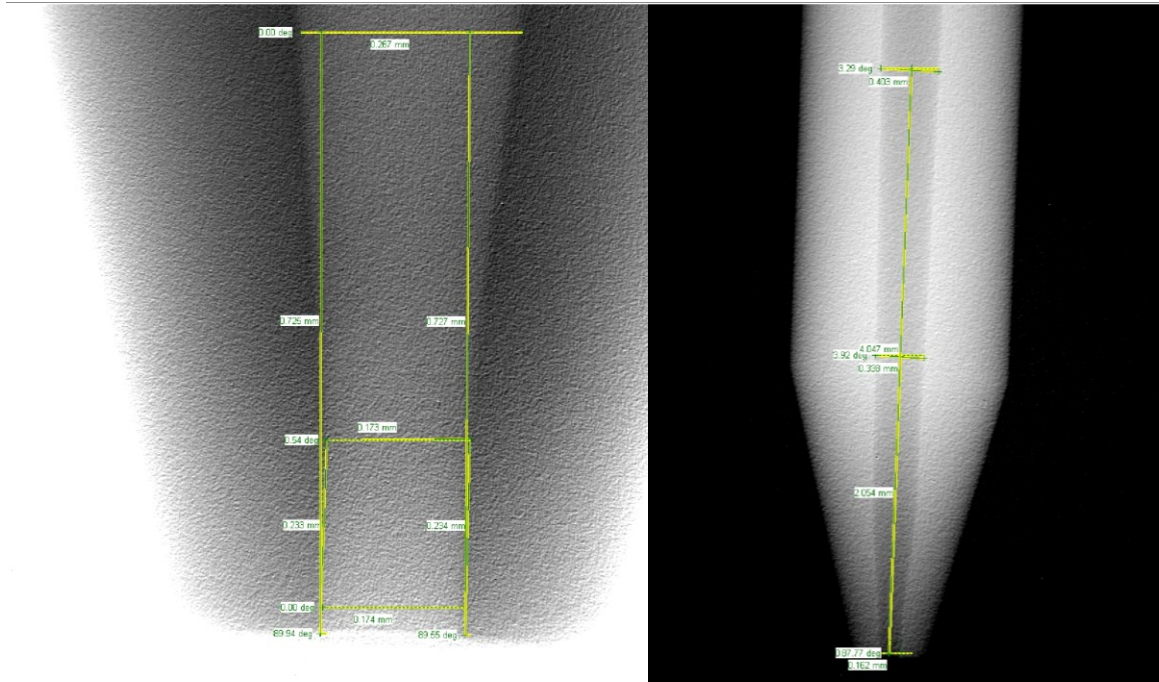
X-ray image of a) ceramic nozzle with 175 μm inner exit diameter and b) zoomed view of same nozzle showing straight section at nozzle exit, reprinted from Akhatov et al. [26], Copyright 2008, with permission from Springer.
